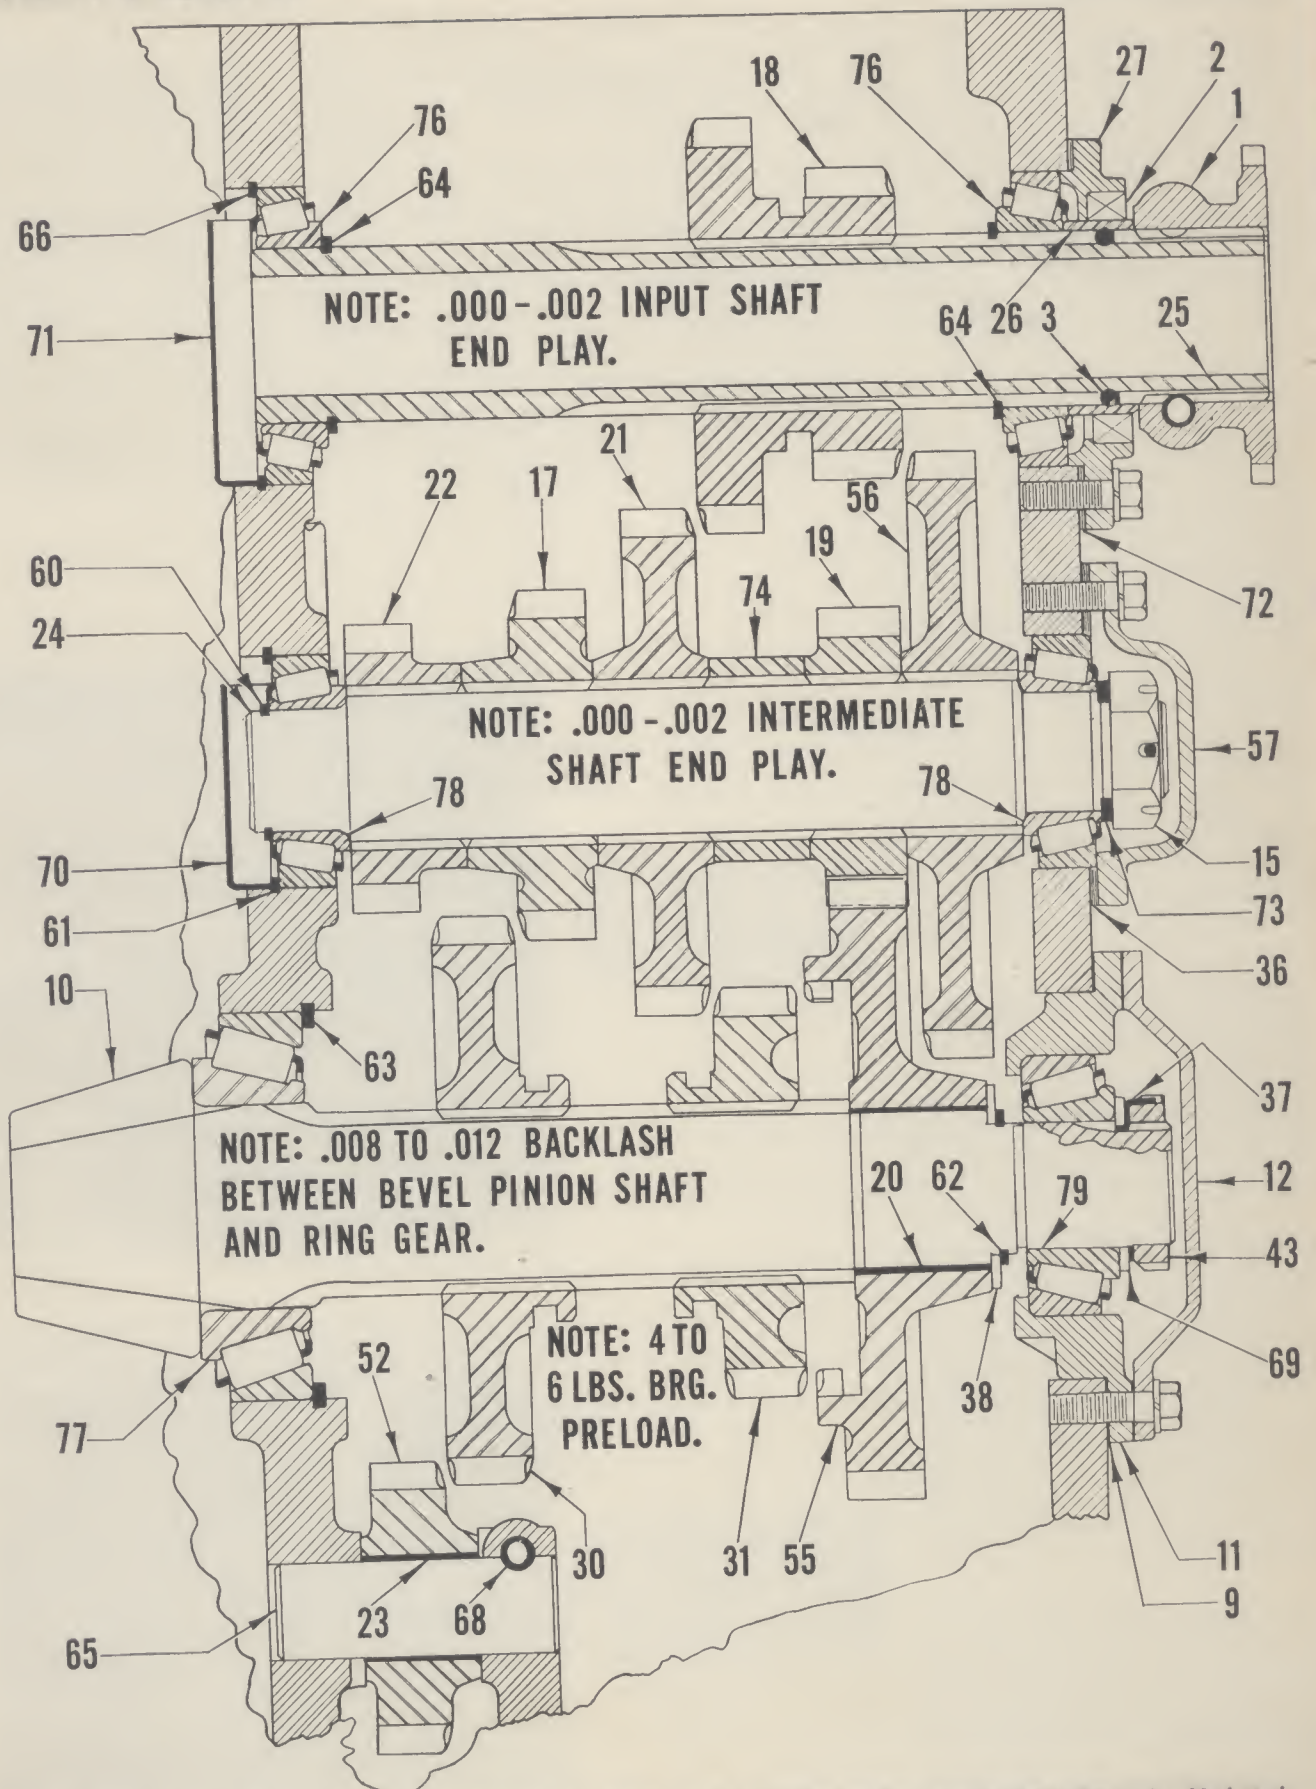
Section through 6 speed transmission. All shafts can be removed without removing the shifter forks. Mesh position of bevel pinion shaft is fixed. Removal of this shaft requires removal of right hand wheel axle shaft and bull gear, left bull gear and the differential. Input shaft (71) is slightly different beginning with tractor serial 521300. Refer to Fig. 0589 for parts legend.
